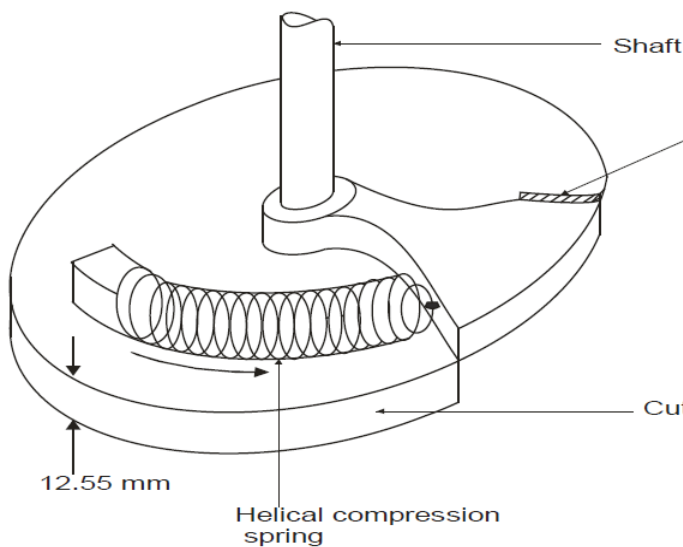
Working of Shaft Bearing in Digger Machine (Closed Assembly)
